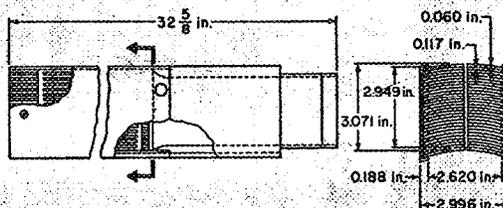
Borax-1 fuel element used 18 plates each 60 mils thick; Borax-2 element had 10 plates of same thickness; both element types had external dimensions shown
